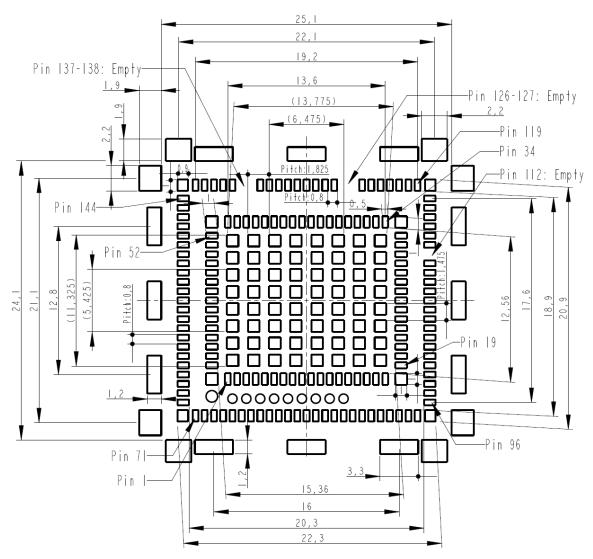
Recommended WP and RC76 Series Snap-in Socket Footprint - Copper Layout Position
